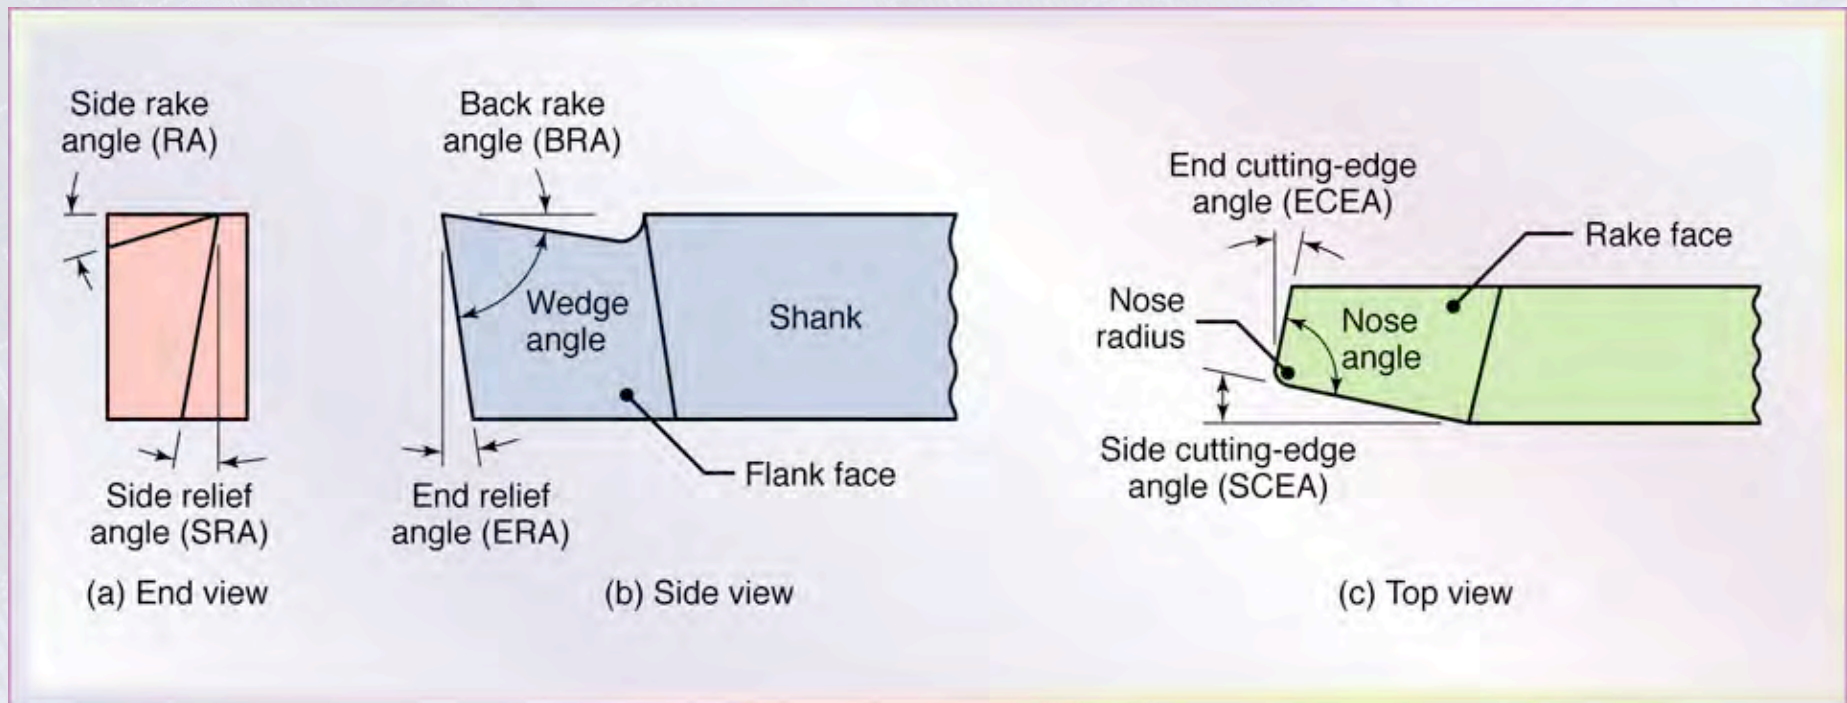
Designations for a right-hand cutting tool. Right-hand means the tool travels from right to left, as shown in Fig. 23.3.
